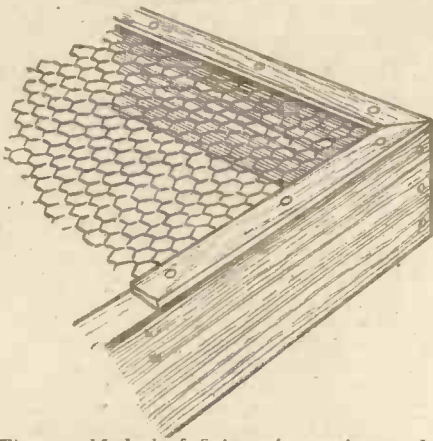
Method of fixing wire netting to the bottom of the sieve tray.
